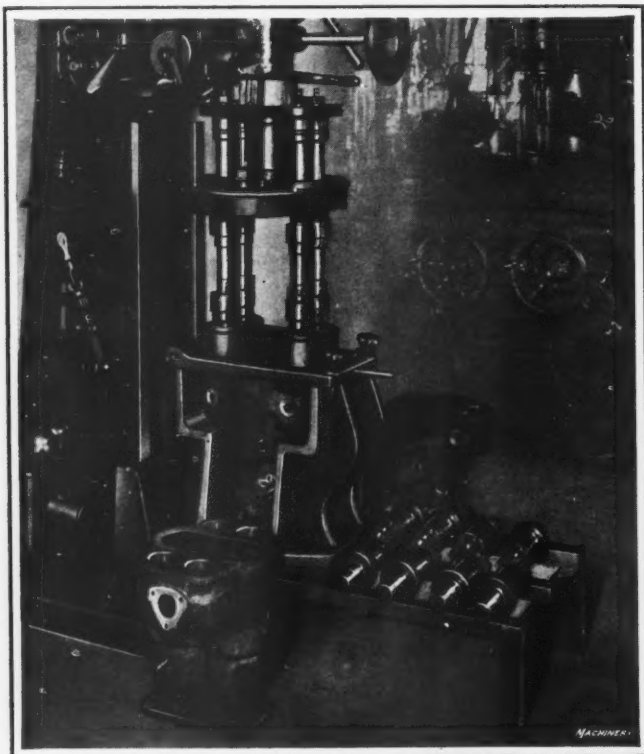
Four-spindle Auxiliary Drill Head built by Sellew Machine Tool Co. for machining Peerless Motor Cylinder Blocks
